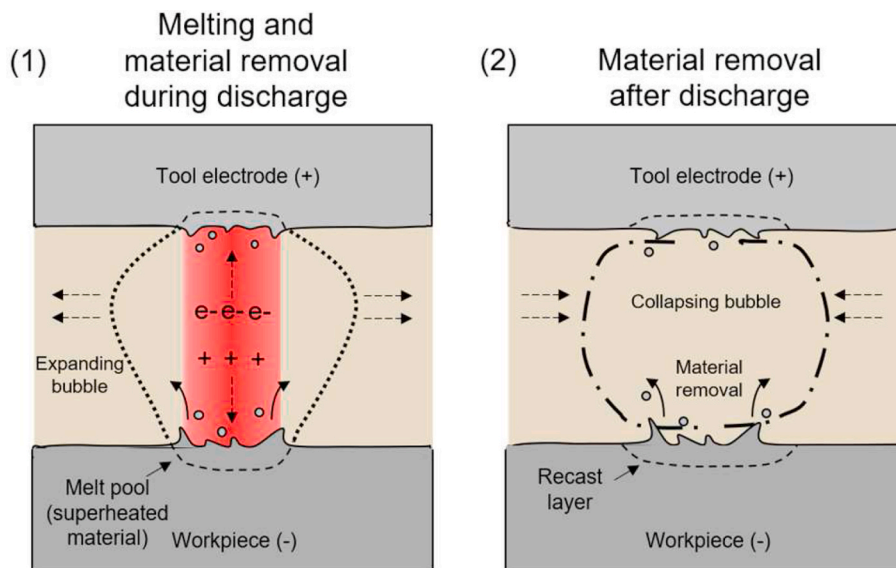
Schematic of the EDM process showing (1) melting of both workpiece and tool electrode via bombardment by electrons and ions respectively and material removal via boiling, and (2) removal mechanism based on explosion of molten material into discharge gap after rapid drop in pressure. A recast layer forms where molten material is not removed. Several sources have been combined to create this summary of the mechanism ([207–212]).
